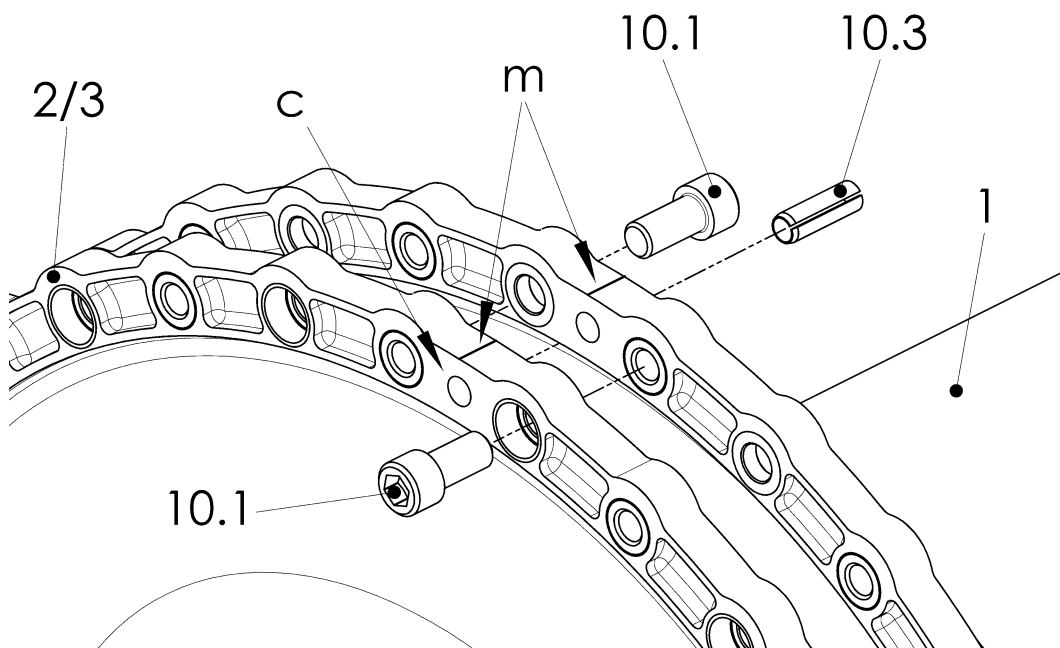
Coupling sizes 0, 1, 3 and 5: Mounting the tube to the membrane
